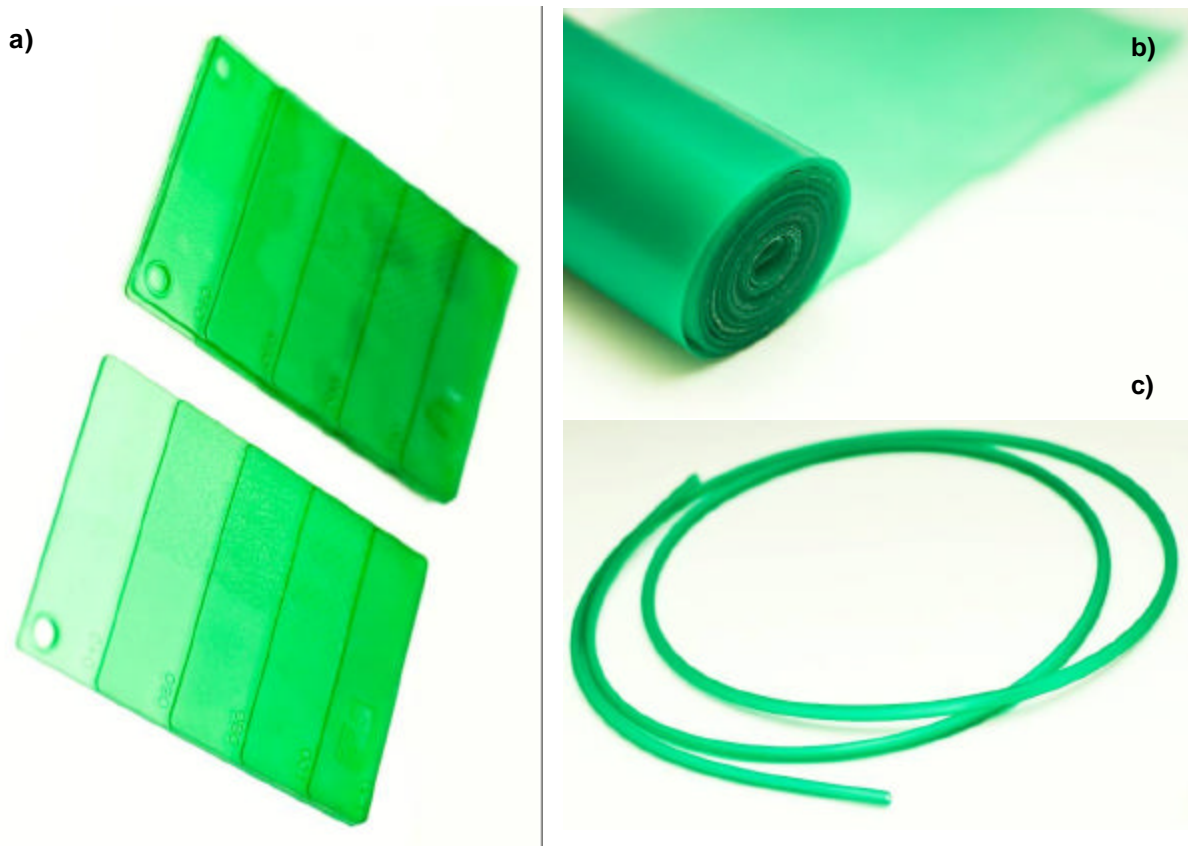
70 Shore A Versaflex™ BIO a) Molded Plaques, b) Extruded Sheet , c) Extruded Hose
